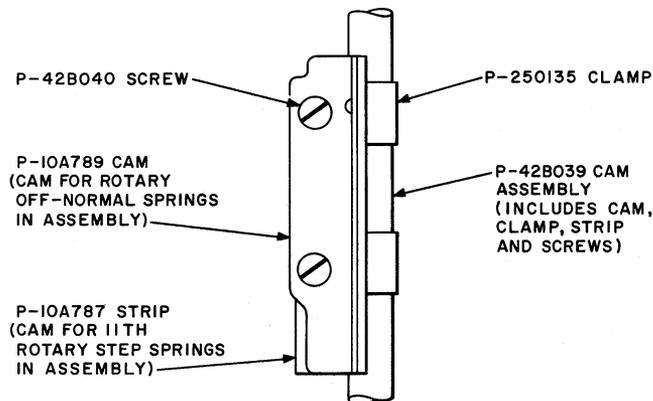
Parts for Cam Assembly Used with Rotary Off-Normal and Rotary Step Spring Assemblies
